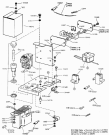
TEST TUBE WATER OPERATING MACHINE
